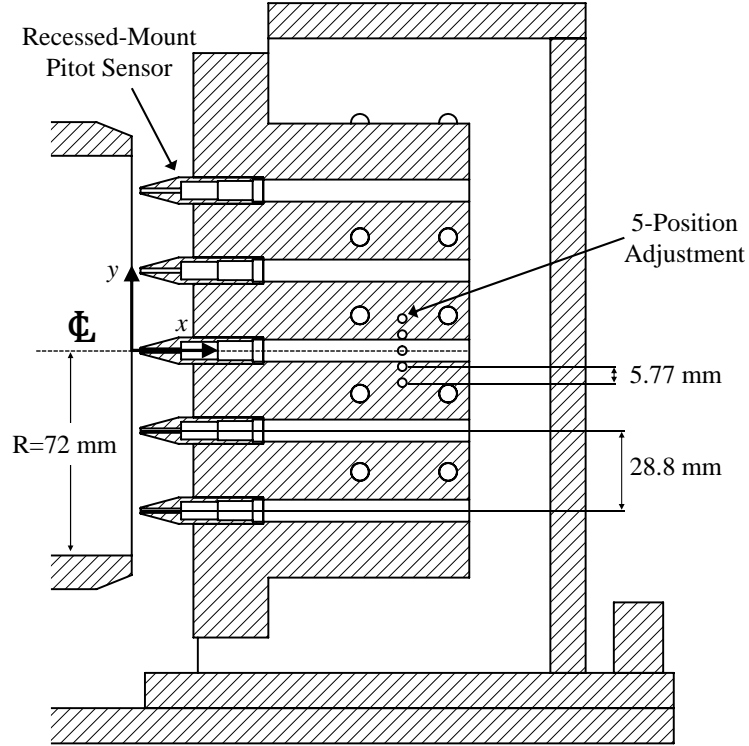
Schematic of pitot rake assembly in the test section. In this configuration the rake is in its radially centered position.
